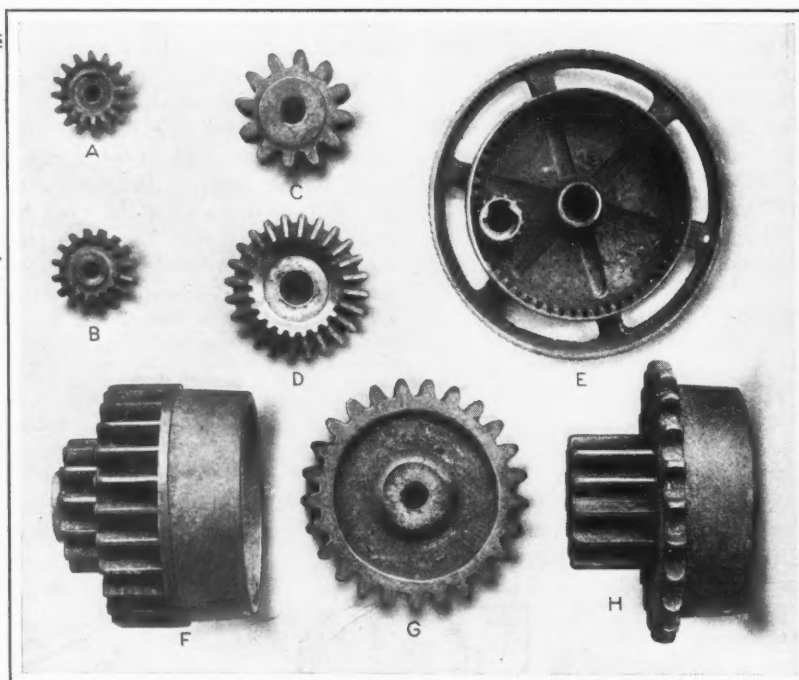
Gears of Various Sizes and Types produced from Metal Patterns and completely machine-molded
